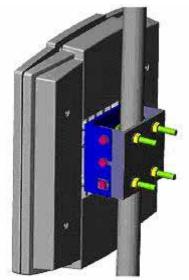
Mounting Parts for an Outdoor AB-Extender
